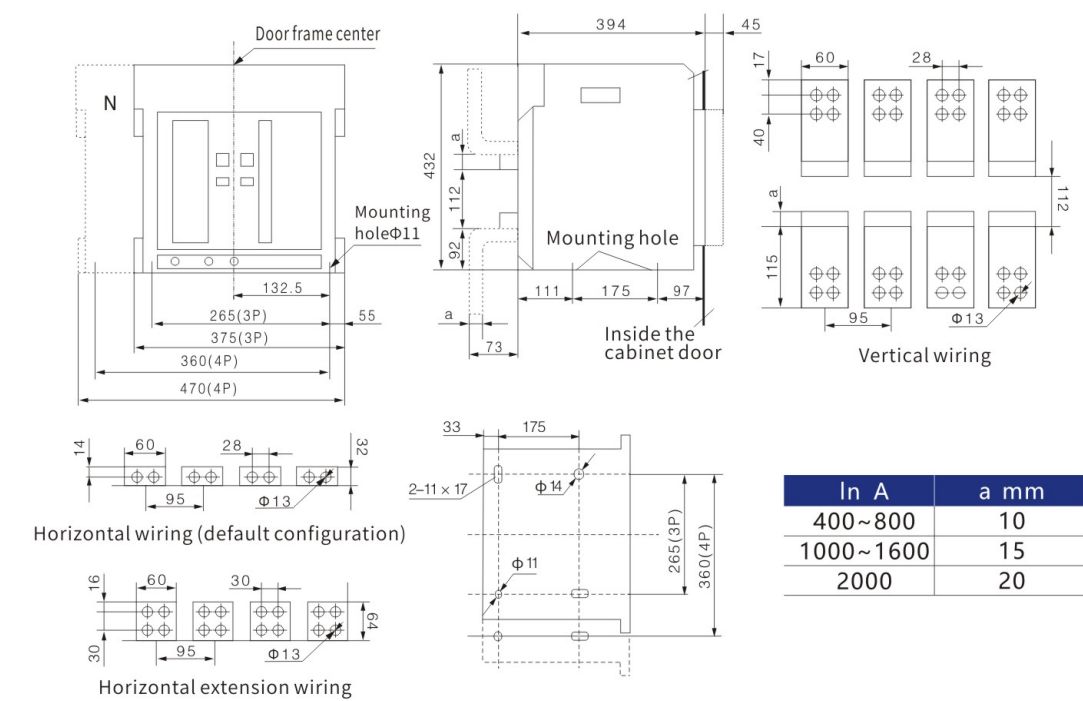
Outline and installation dimension of the draw-out type circuit breaker (W1-2000, 2000/4)
